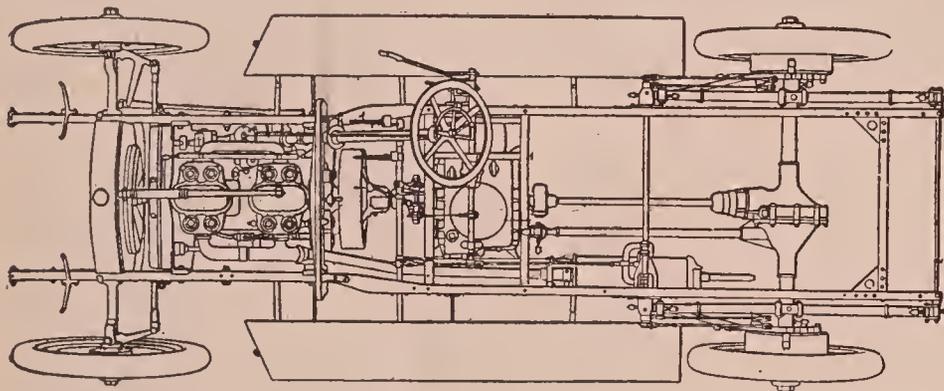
General appearance of the complete car mechanism when the body is removed.
